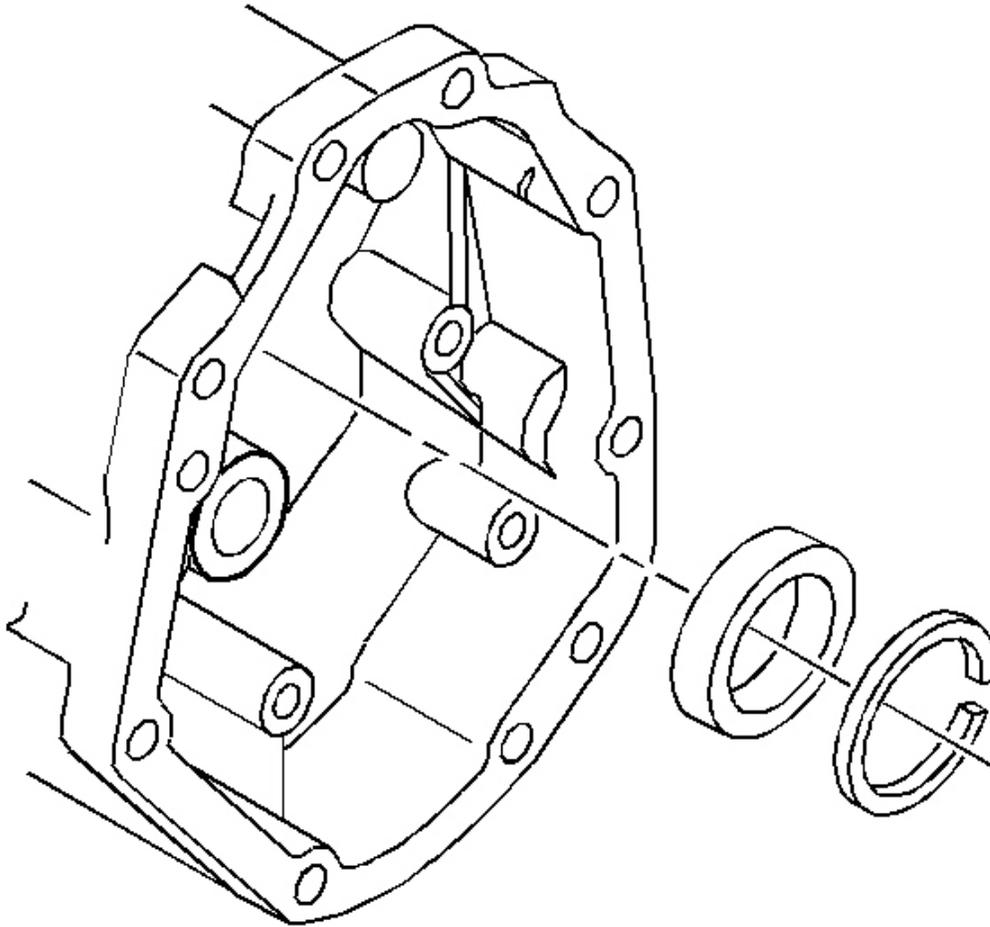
Locating Mainshaft Bearing Race Retainer Ring & Race
